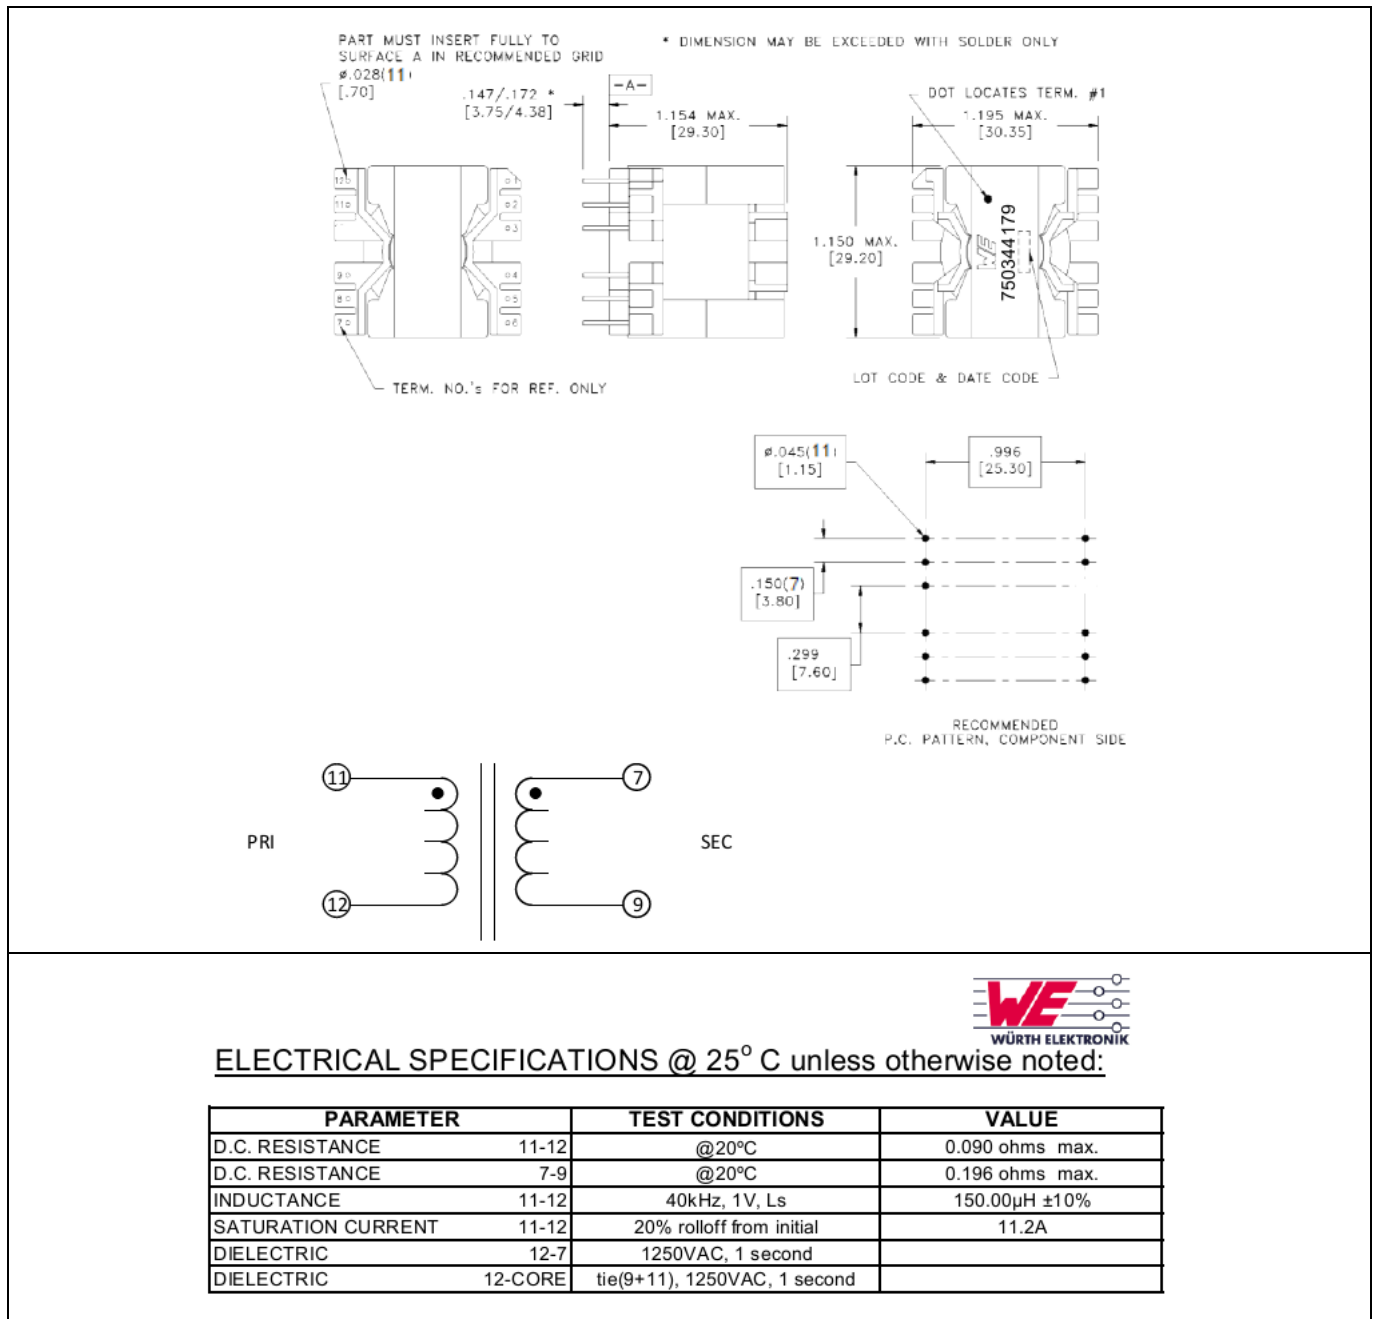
Würth Elektronik PFC choke 750344179 rev01 specification
